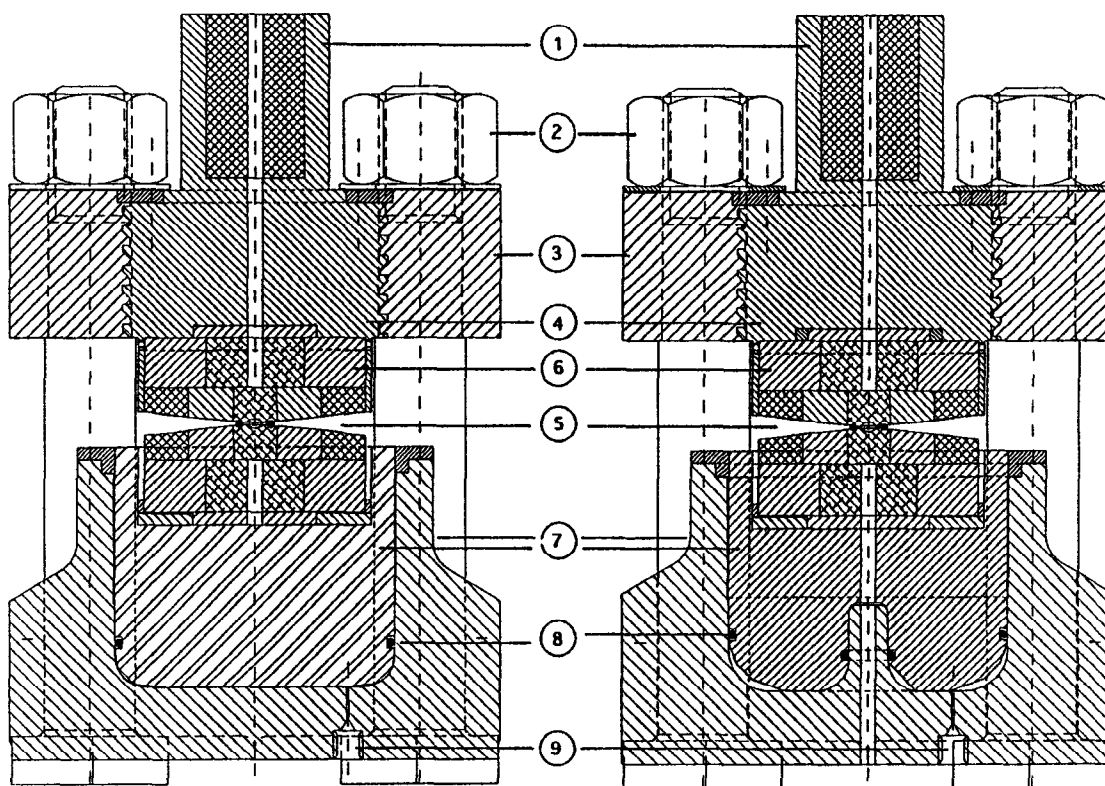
Cross cut of two versions of high pressure cells V3 (left) and V2 (right). (1) collimator, (2) nuts and tie rods, (3) top platen, (4) breech, (5) anvils, (6) anvil seats, (7) piston-cylinder assembly, (8) hydraulic fluid seal, (9) high pressure fluid inlet.
